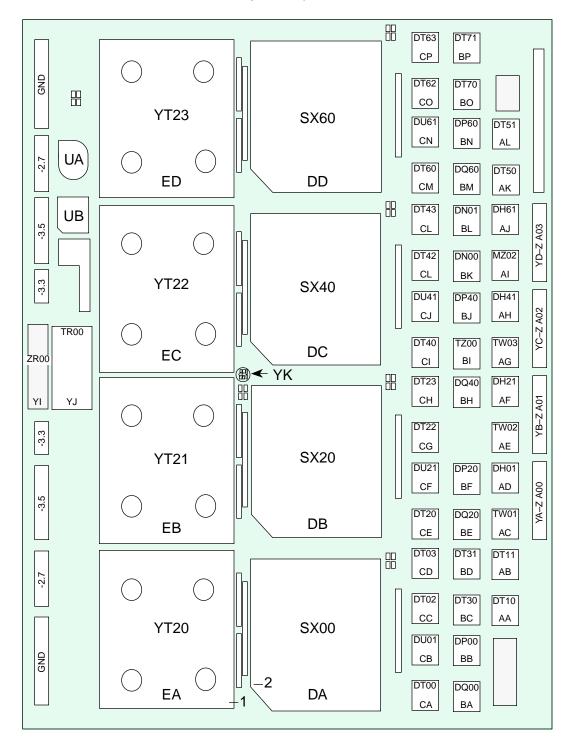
illustrates Board 1 of the IO module assembly. Board 2 contains the same number of GigaRing (SX) components and I/O (YT) connectors as Board 1.
